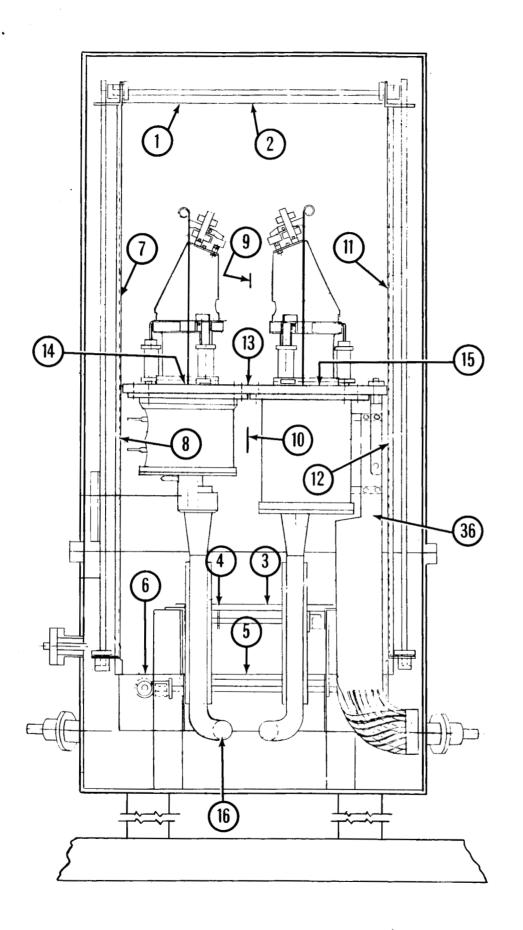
AC Breaker and DC Contactor, on Heat Sink, Mounted in Ultra-High Vacuum Tank Just Prior to Installing Oven Top for Heat Run Test.
